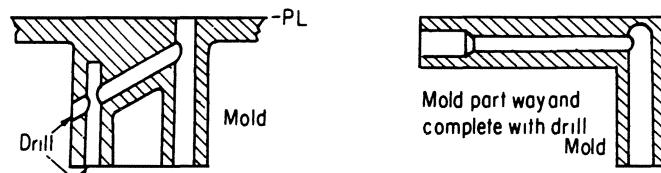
Holes impractical to mold must be drilled, but they must not be so close to edges or corners that cracks result. A small-diameter hole is difficult to drill along its intended direction to any great depth, so the most practical approach in many products is to mold it part way and then drill it the remainder of the distance.
